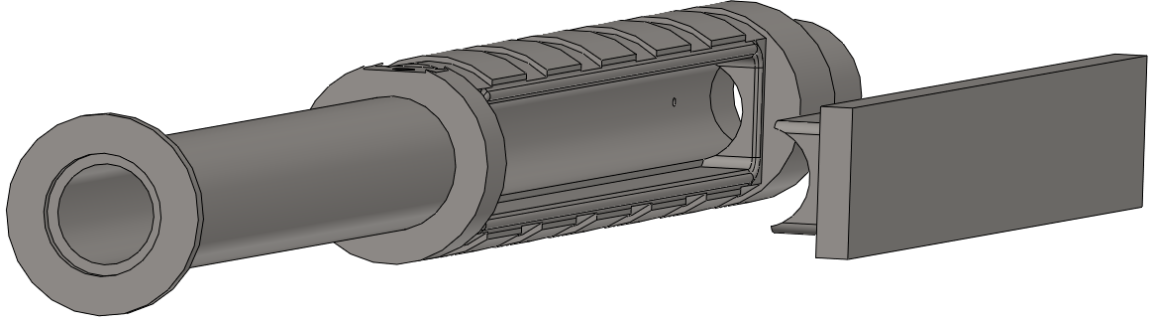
Test piece showing removable test insert (gasket and clamps omitted for clarity). Flow direction left to right.
